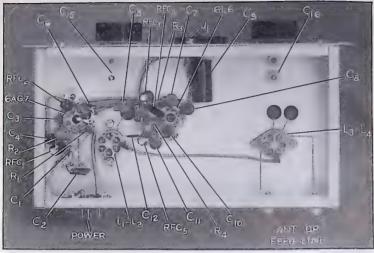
Bottom view of the two-tube low-power transmitter. The chassis measures 7 by 13 by 2 inches.
